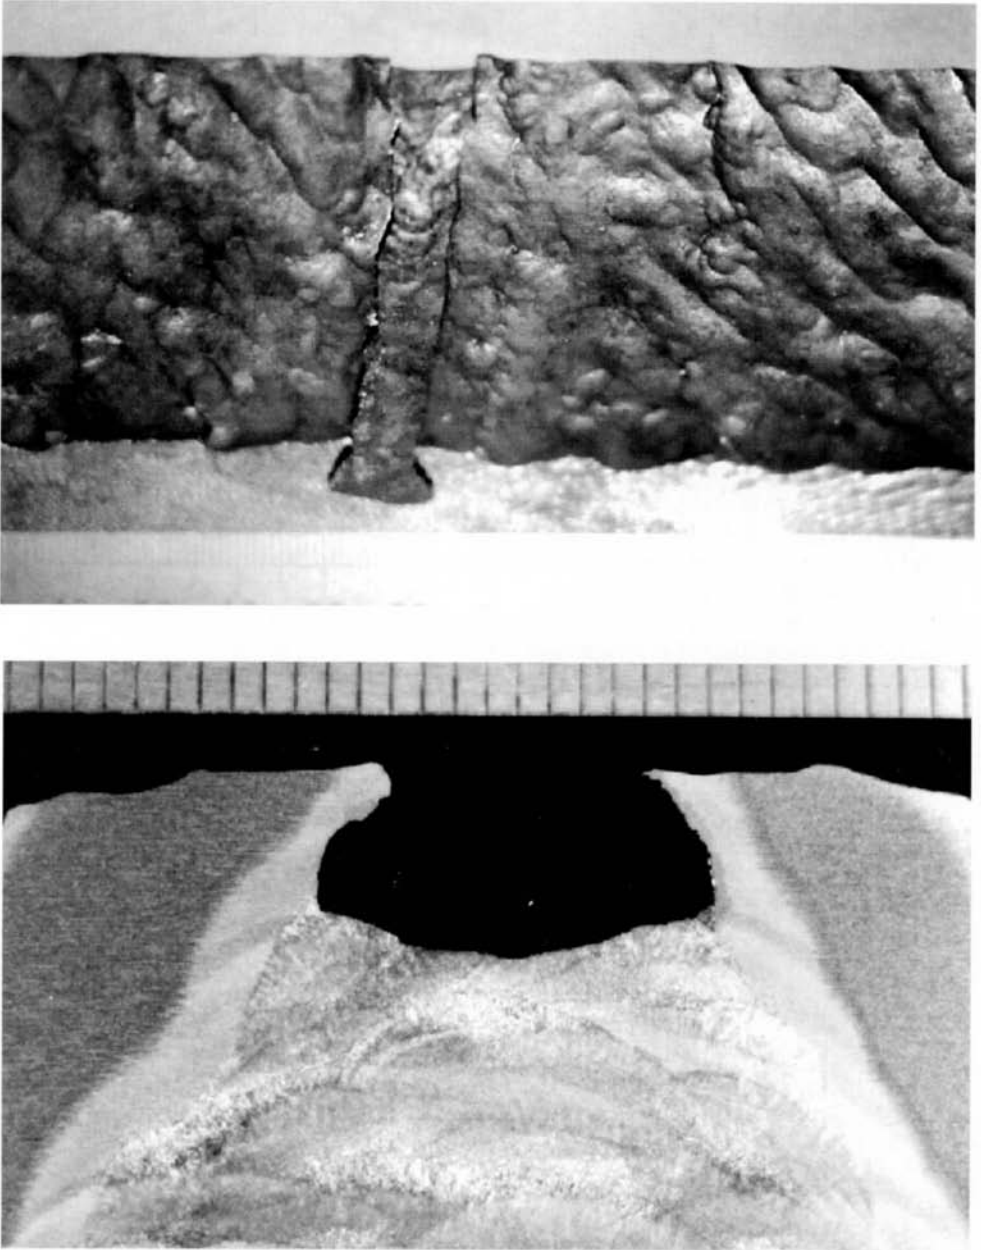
Example of preferential weld corrosion in a CO₂ environment. (Resolution of original photographs supplied at 72 dpi.)
